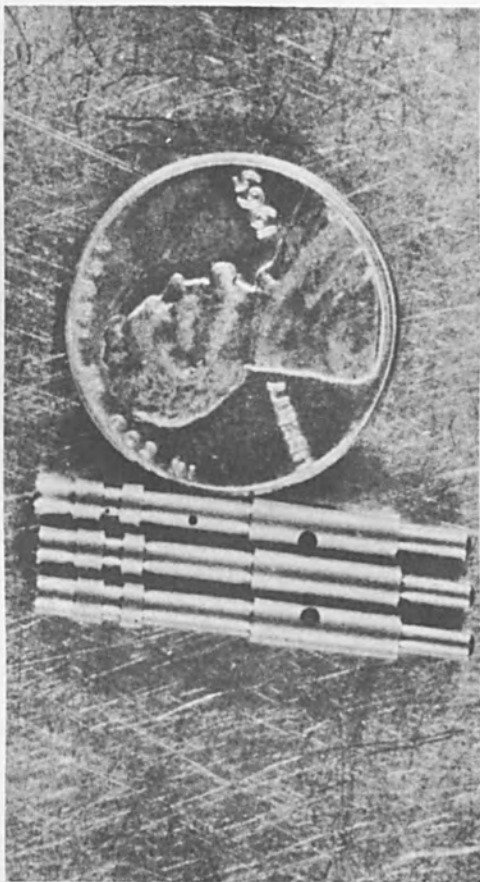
Piston type plunger with EB-welded ball-bearing plugging end access hole.
